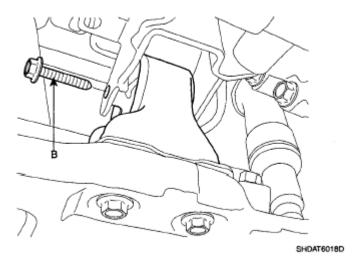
Identifying Roll Stopper Mounting Bolts (2 Of 2)
